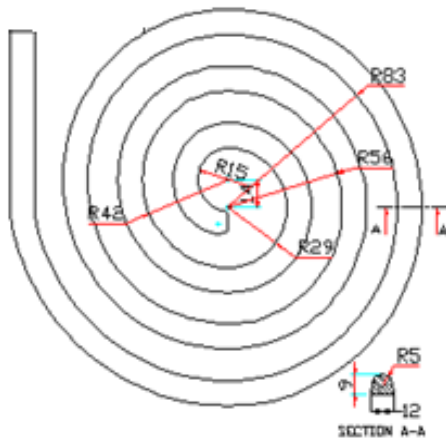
Dimensional details of the spiral fluidity pattern (in mm)
